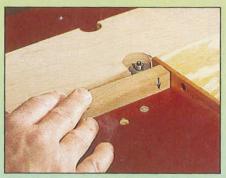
Photo C: Use same setup (with shim still in place) to slot stile edges for bottom-rail joints.
